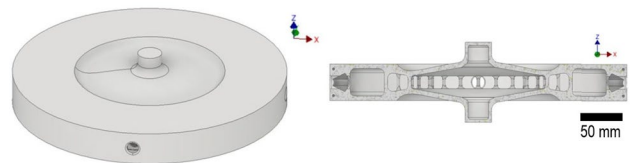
CAD-Model of final developed flywheel model with struts and holes
